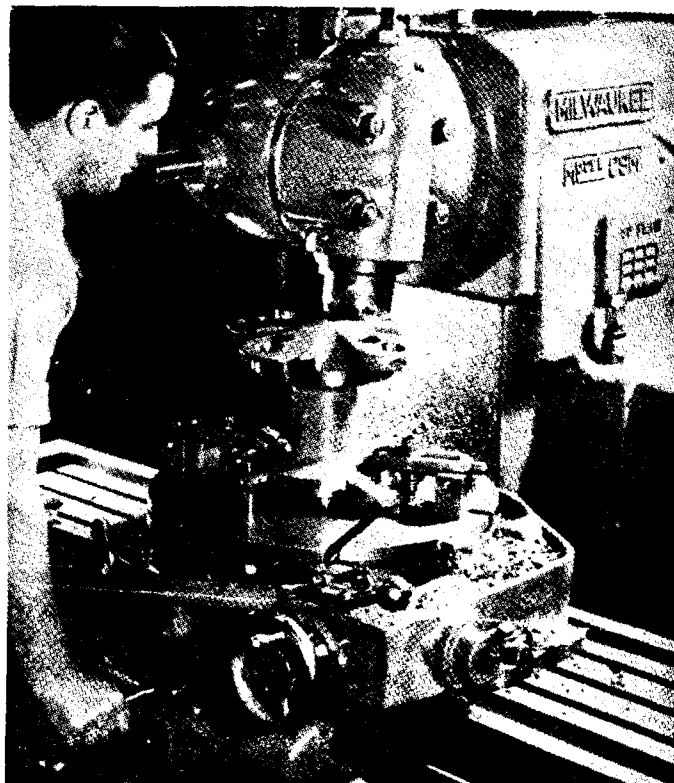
Special carbide milling set up on horizontal milling machine. Use of vertical head and rotary table detracts from rigidity.
